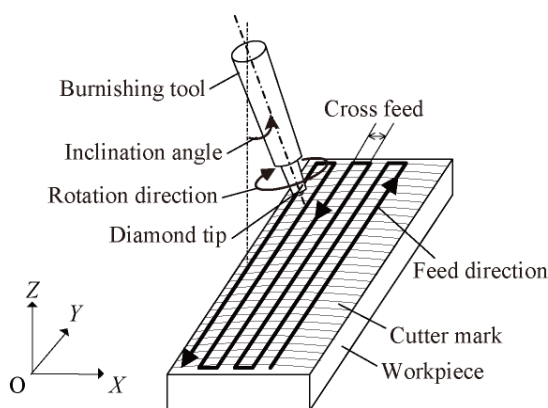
Schematic illustration of burnishing process with inclined rotating tool
